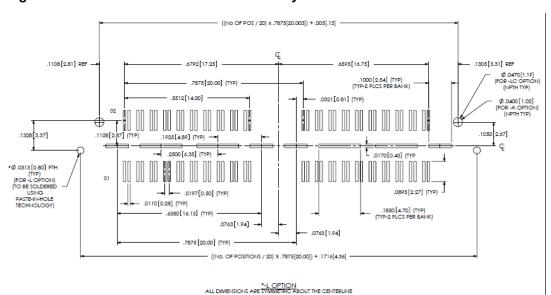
QSH-XXX-01-X-D-DP-XXX PCB layout recommendation
